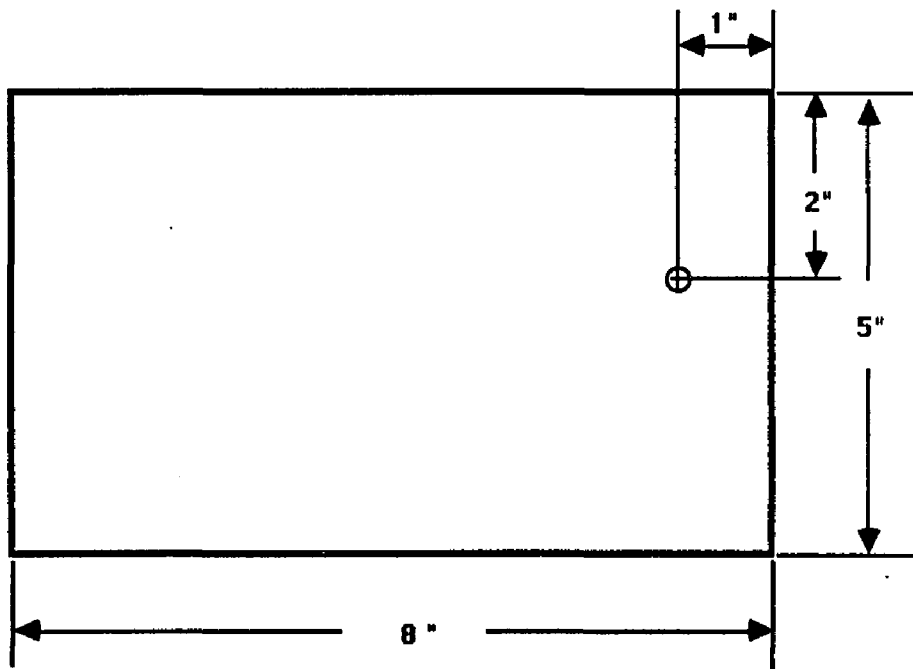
Connector Feeder Footprint in the Wire-Harness Assembly Problem
